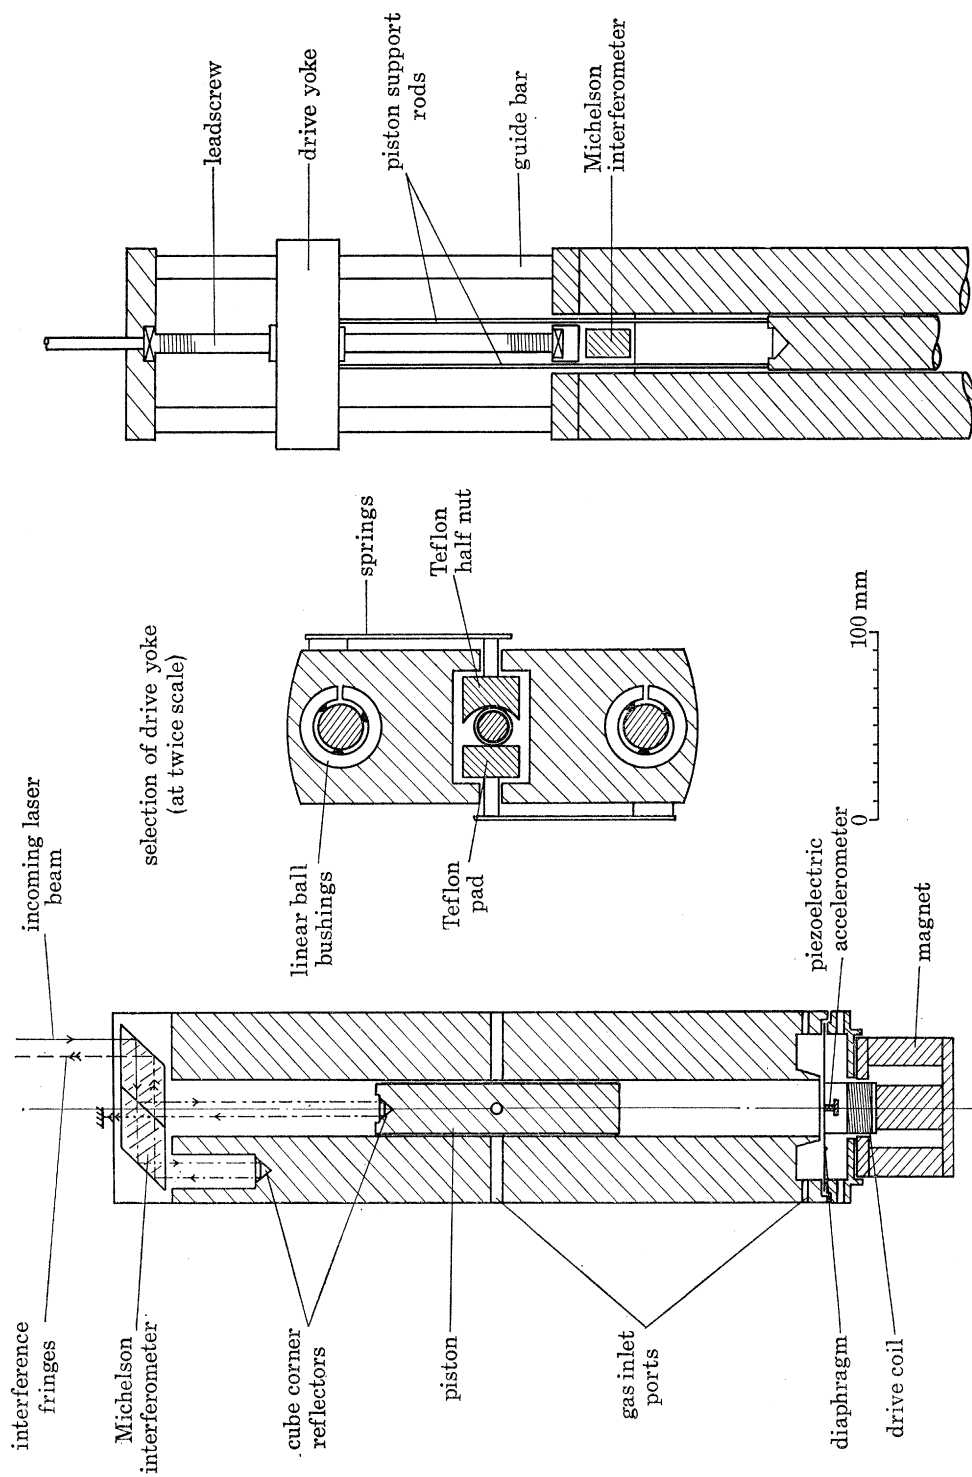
Sectional drawing of the interferometer showing the transducer and optical components.
